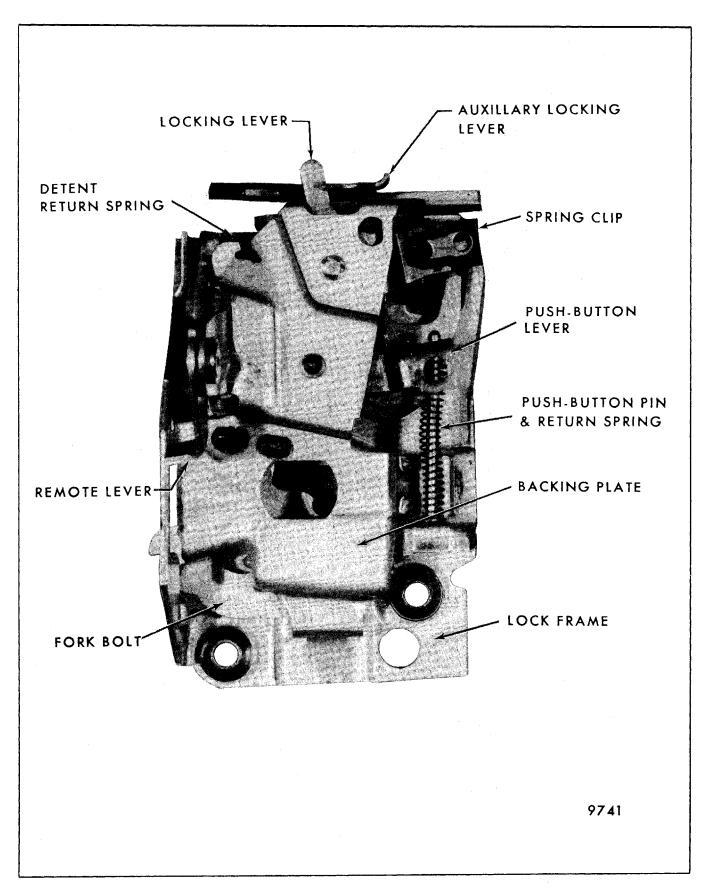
A Coupe Front Door Lock; A Sedan Rear Door Lock (A Sedan Front Door Lock Similar)
